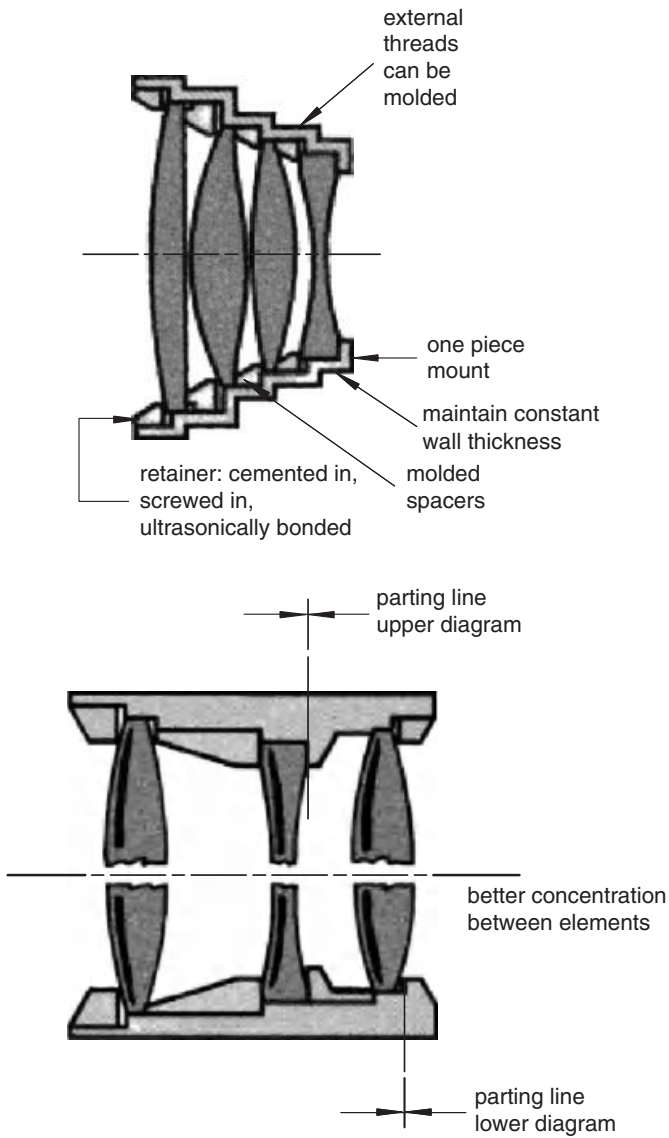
Barrel-type lens housing (from Ref. [3]). Top: one-piece lens barrel with various shoulders, requiring retainer and spacer rings. Bottom: barrel-type lens housing with two different axial positions of the parting line.
